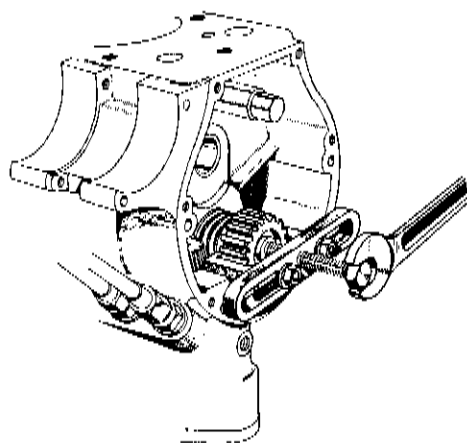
Engine shaft pinion extractor. (Service Tool 61-3256.)
